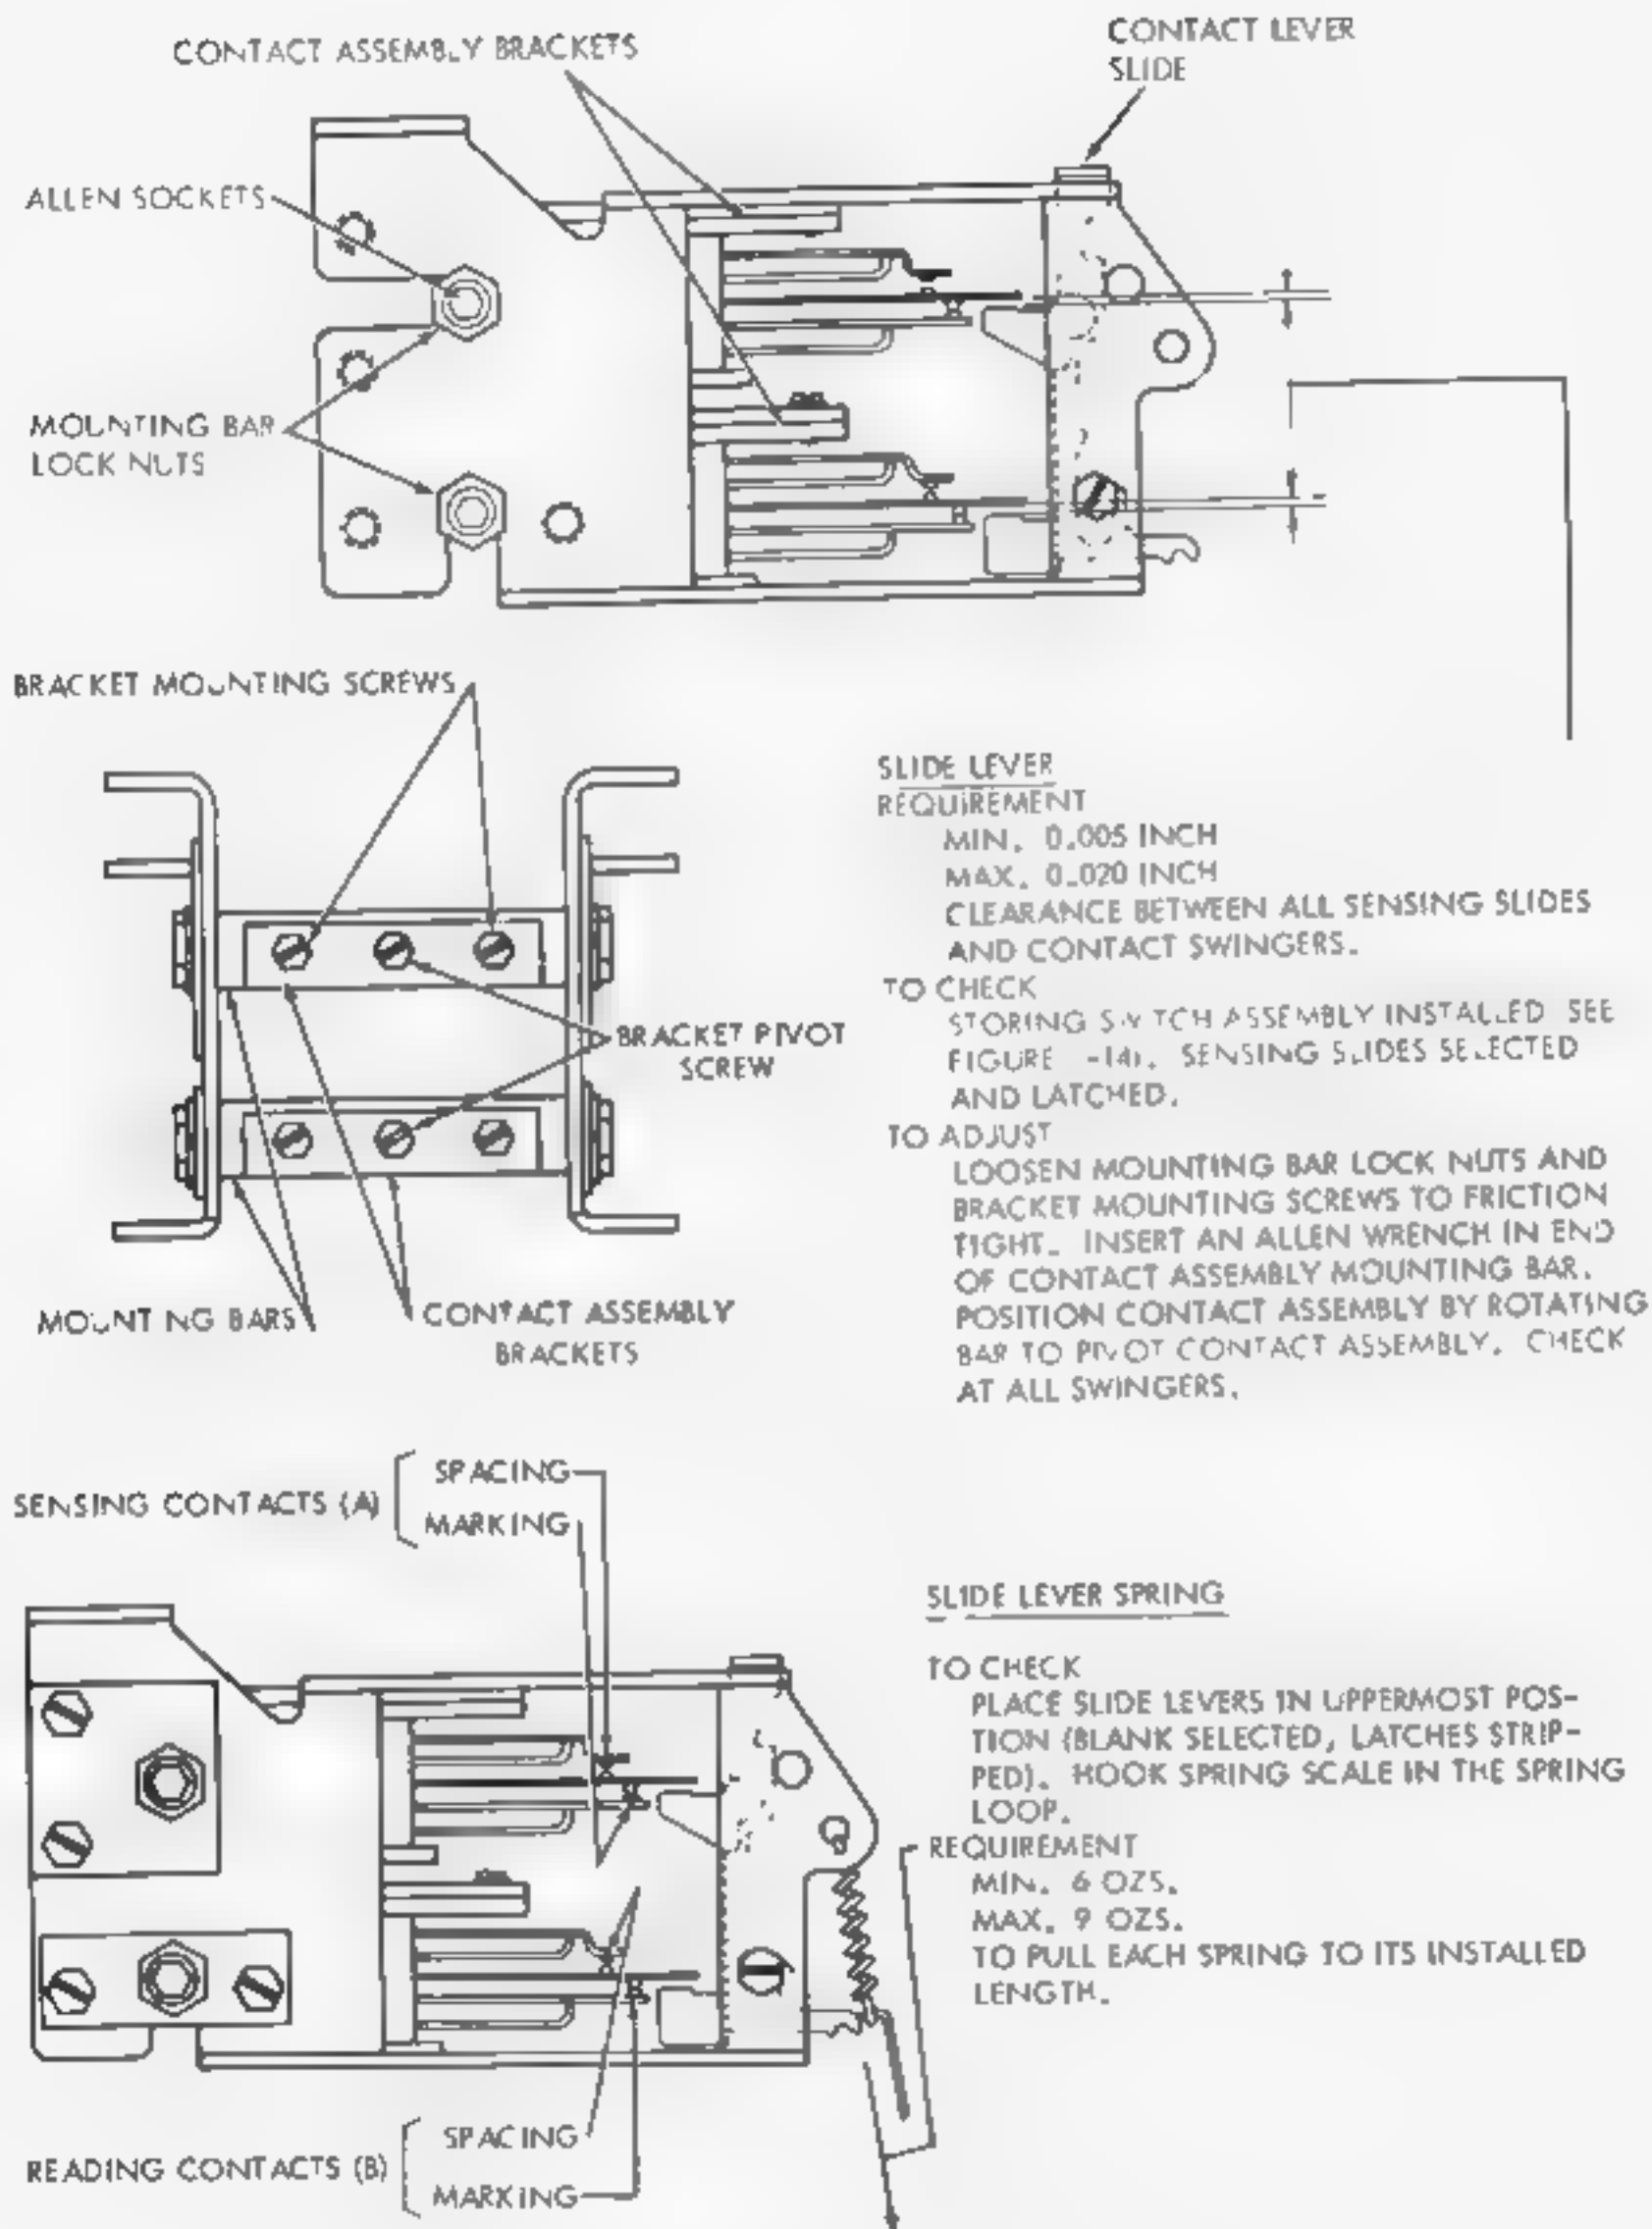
TRANSFER TYPE STORING SWITCH MECHANISM
